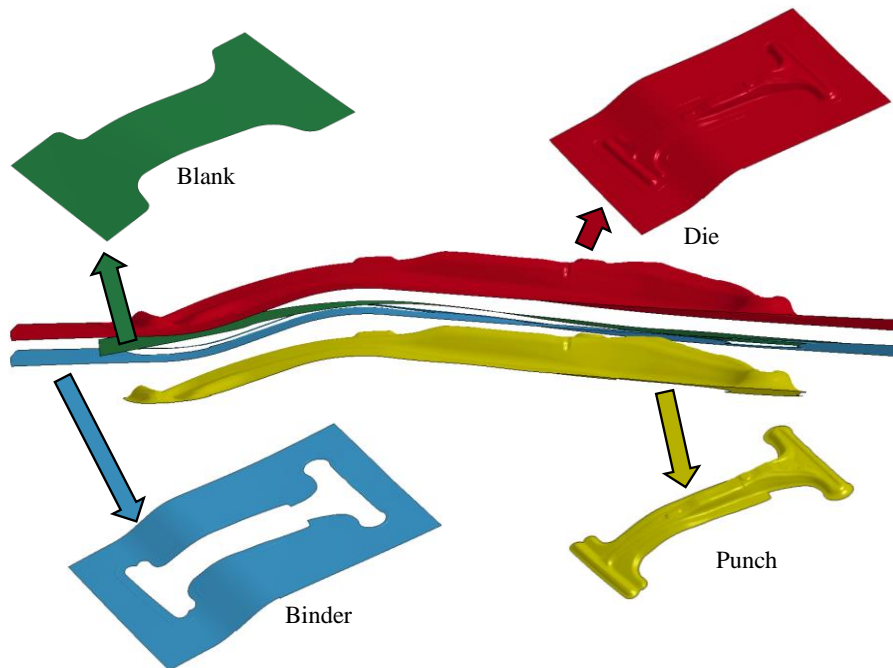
Tool set arrangement of the B-pillar tooling emulating the forming trials
